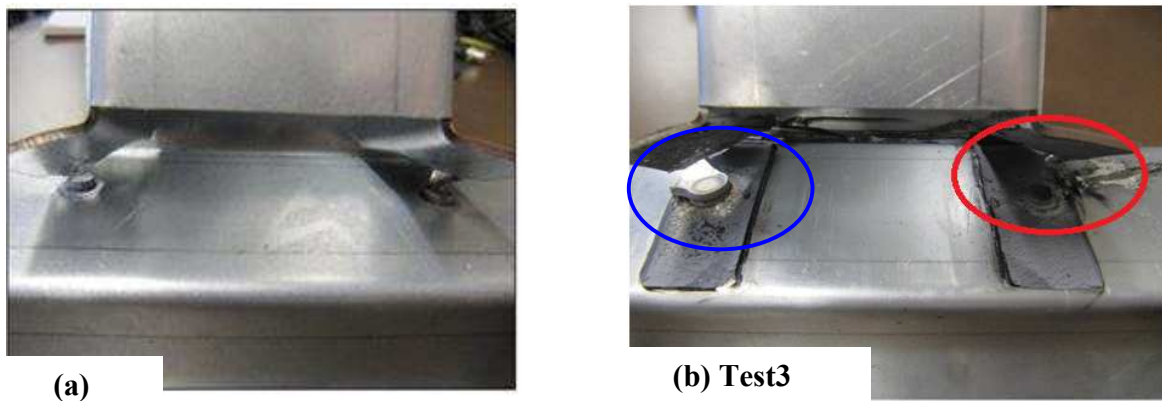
Images of damaged T-joints specimens: (a) spot welds on vertical surface of SW T-joints, (b) spot welds on vertical surface of WB T-joints
